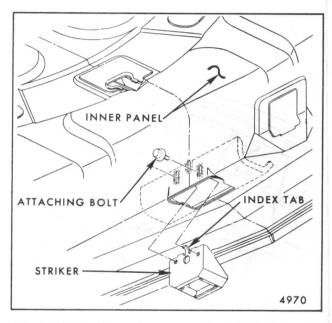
Typical Rear Compartment Lock Striker Mounted in Lid
